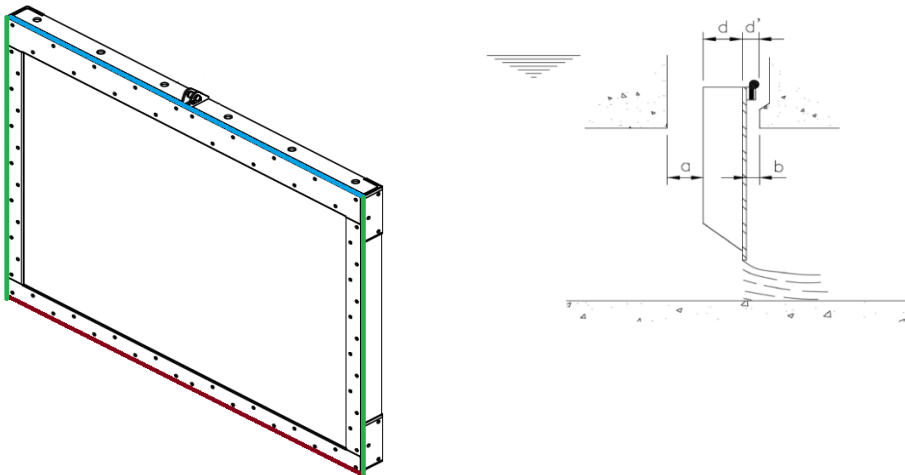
(L) Position of the seals & (R) Top seal at back of valve [17]
